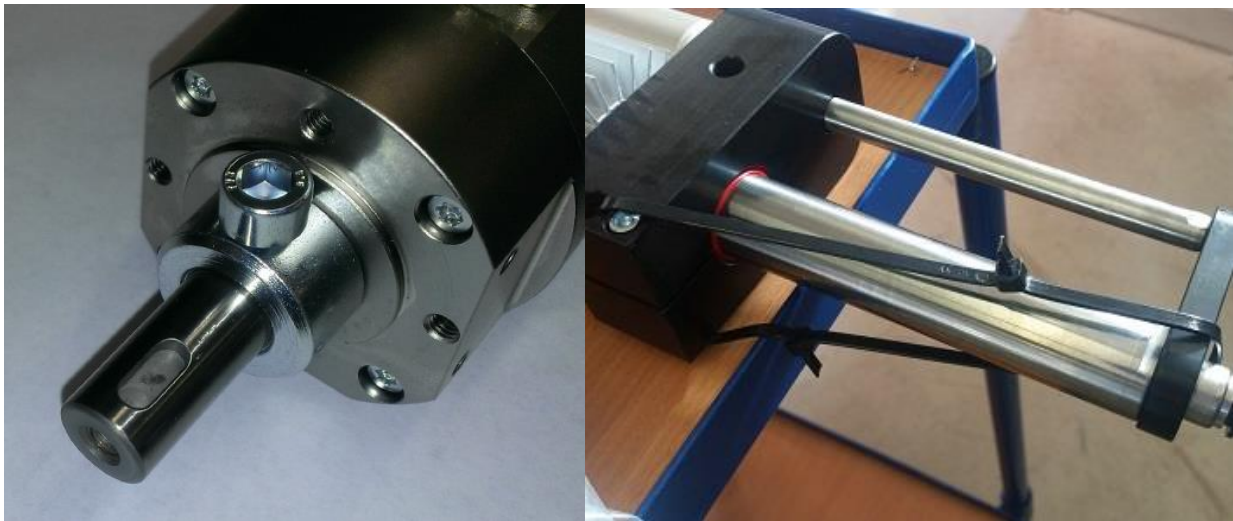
and 4 External stop ring attached to the rod/cable tie holding an adapter
